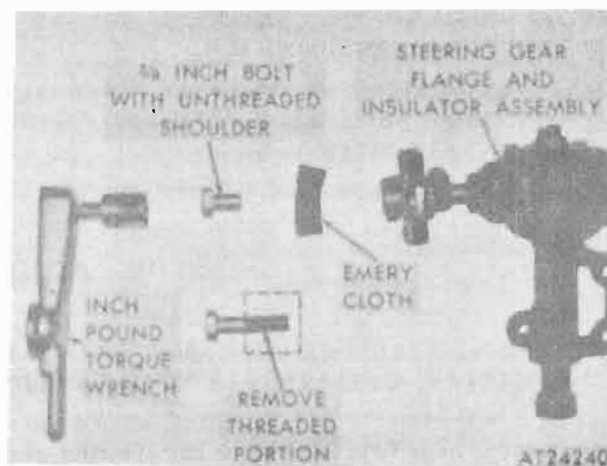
Steering gear adjustment equipment (M151A2, M718A1, and M825 vehicles).
